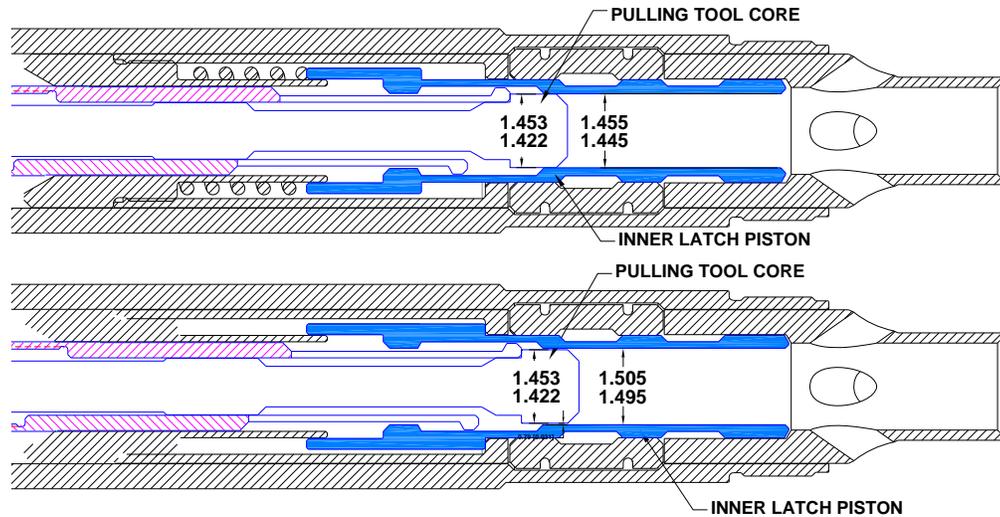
, Inner Latch Piston ID (original top, improved bottom)
